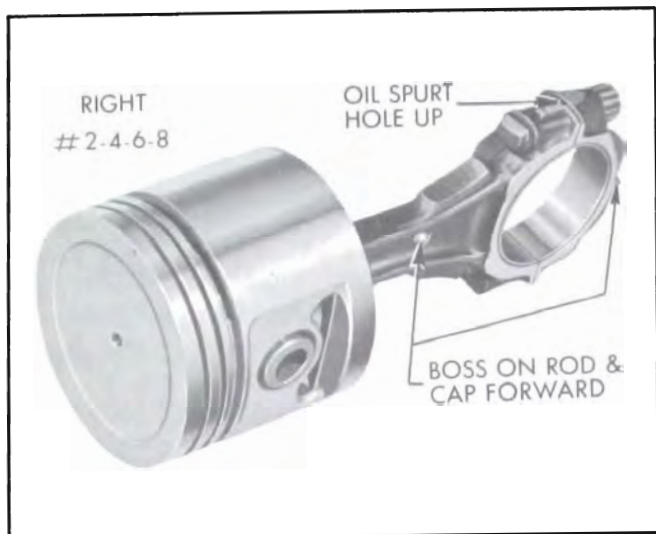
V-8 Right Bank Piston and Rod Assembly
